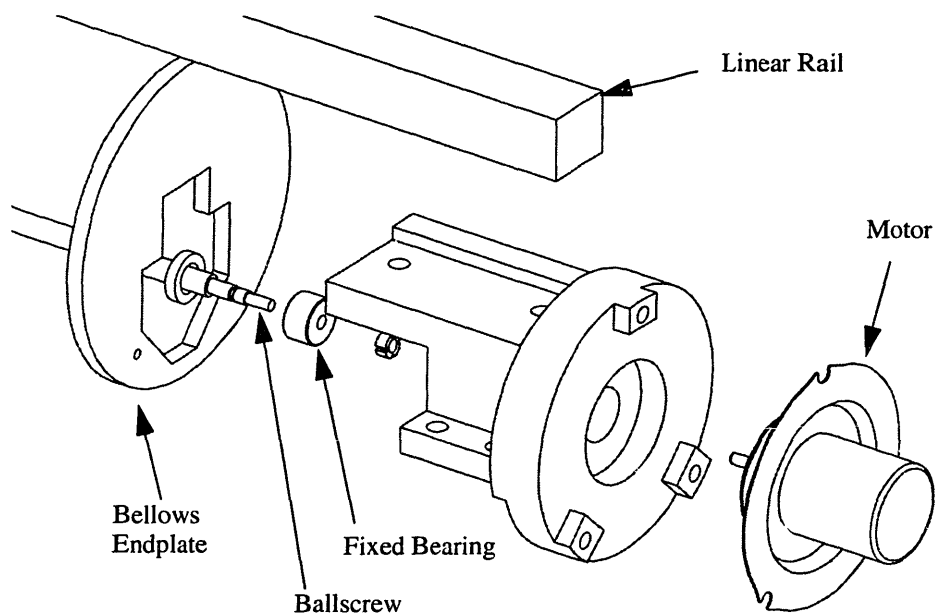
Exploded View of X-axis Motor Mount Bearing Block Assembly
